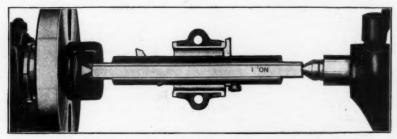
Facing and rounding the end of a connecting rod bearing.
